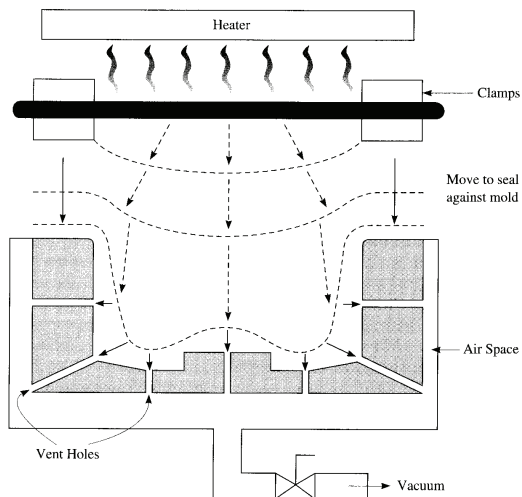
Fundamental, or straight, vacuum forming technique.
